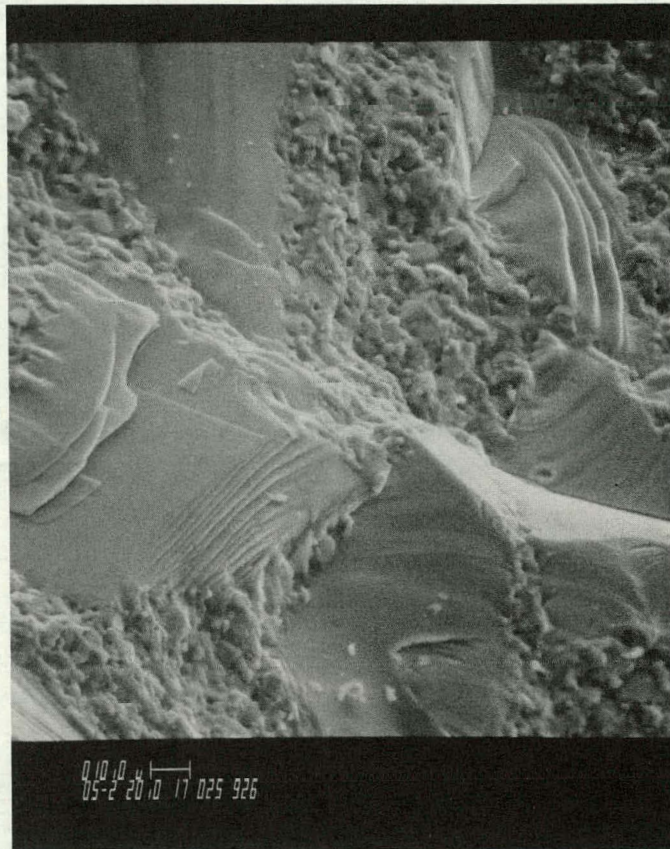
Tube Fracture Surface, High Magnification
